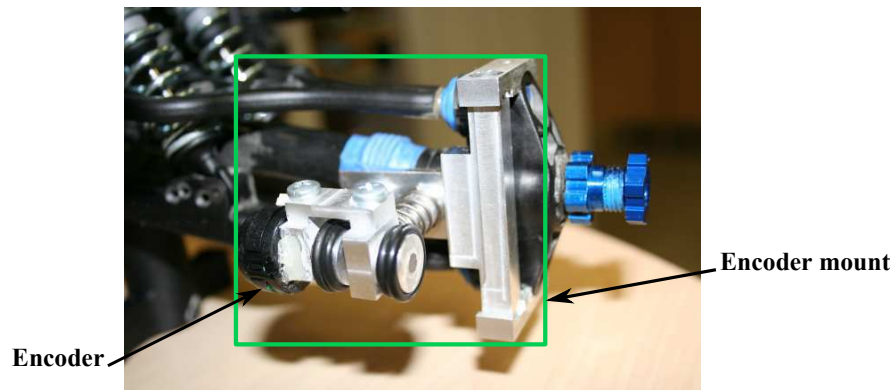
Encoder mount assembly for the autonomous vehicle platform.
